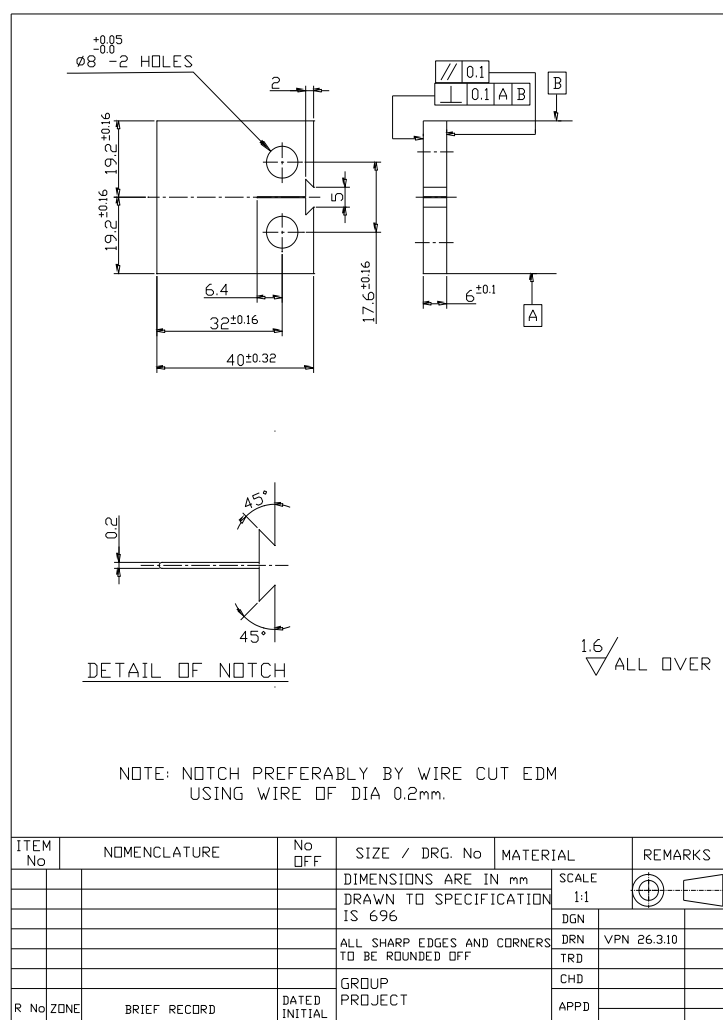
Geometry of CT specimens used for fatigue crack growth testing.
